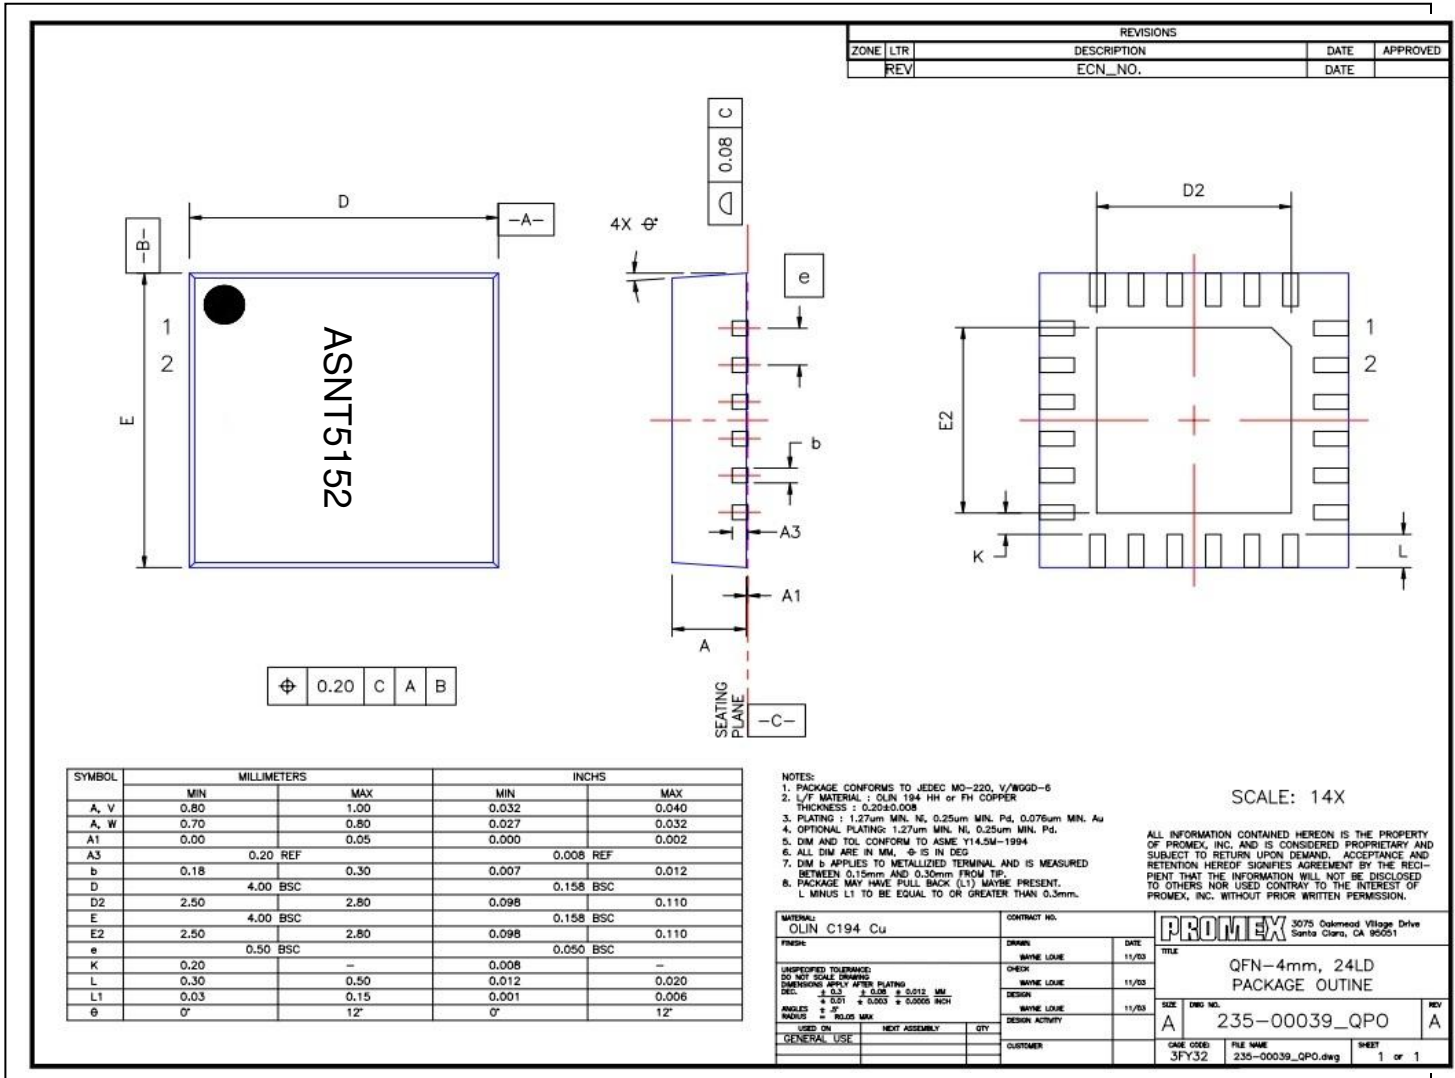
QFN 24-Pin Package Drawing (All Dimensions in mm)
